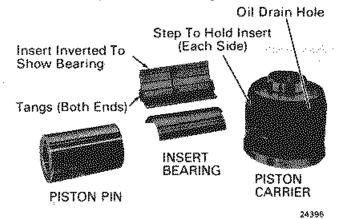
Piston Pin, Insert Bearing, And Carrier
